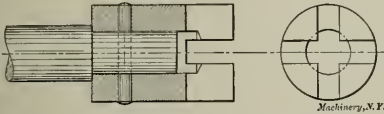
Drive for the Mechanism of the Tool shown in Fig. 10.
